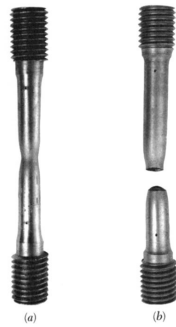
Ductile material tested specimens: (a) with cross-section necking, (b) ruptured.
